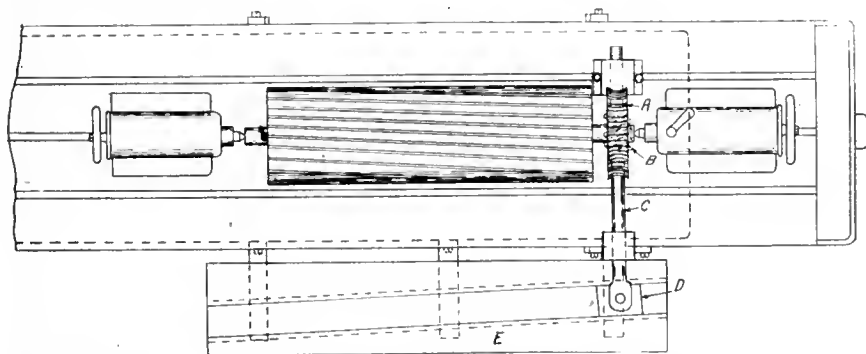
MACHINING SPIRAL GROOVES IN RUBBER RECLAIMING ROLLS.
